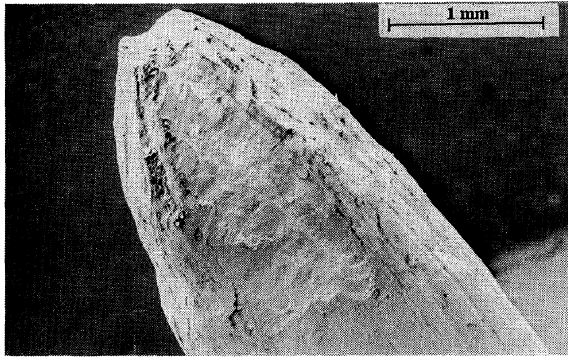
Fracture surface of the unconstrained lead wire under cyclic loading.
